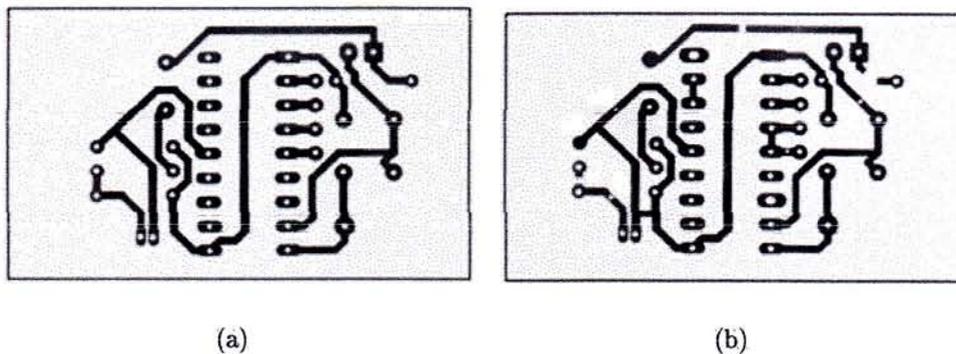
(a) A template bare PCB image; (b) a defective bare PCB image
